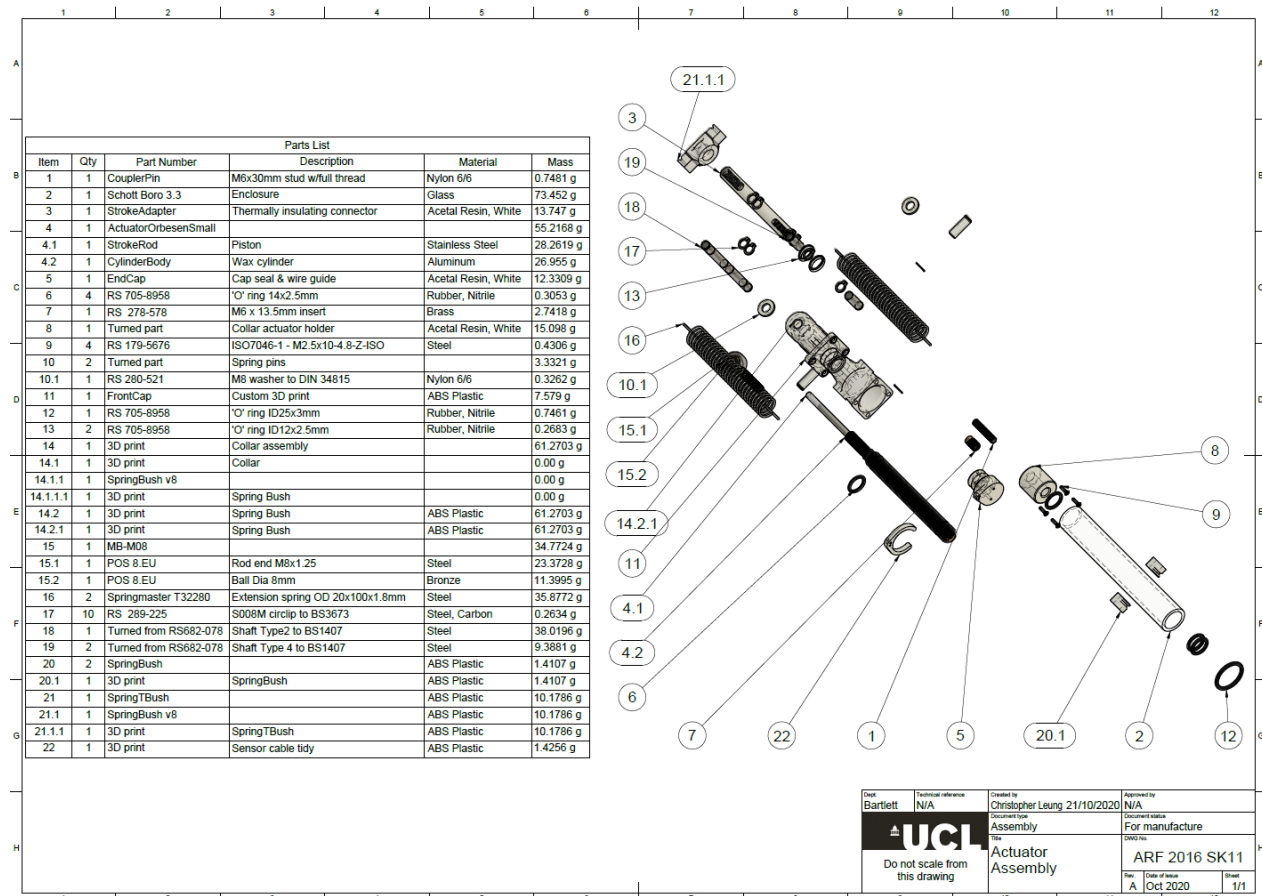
BILL OF MATERIALS (BOM) EXTRACTED FROM THE DESIGN FILE AND EXPLODED ASSEMBLY WITH PART REFERENCING CREATED USING THE ANIMATION WORKSPACE
